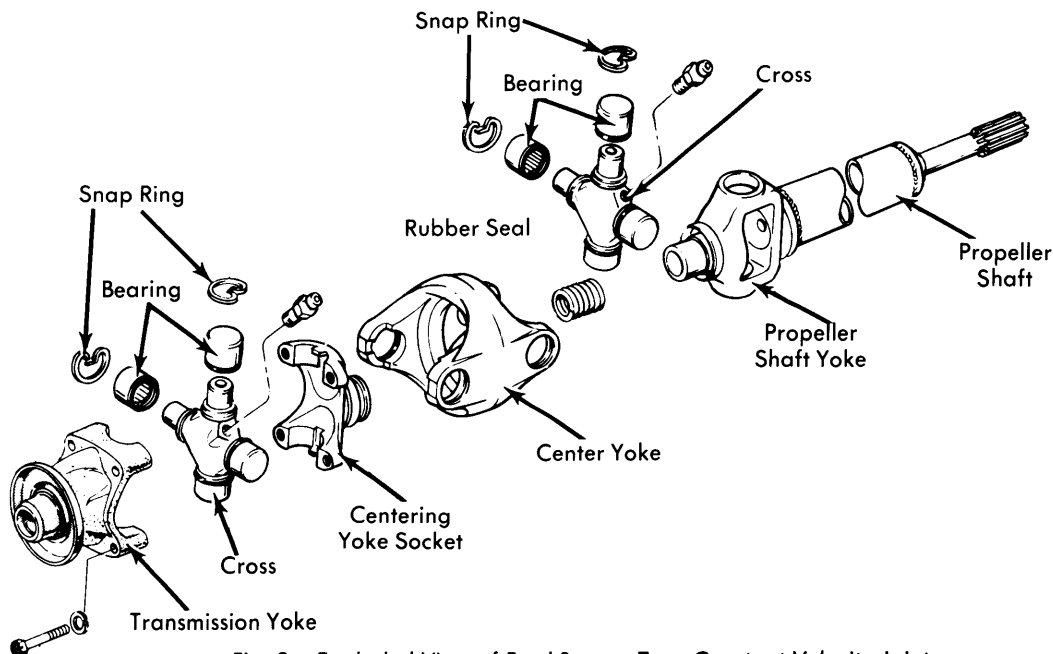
Exploded View of Ford Bronco Type Constant Velocity Joint
